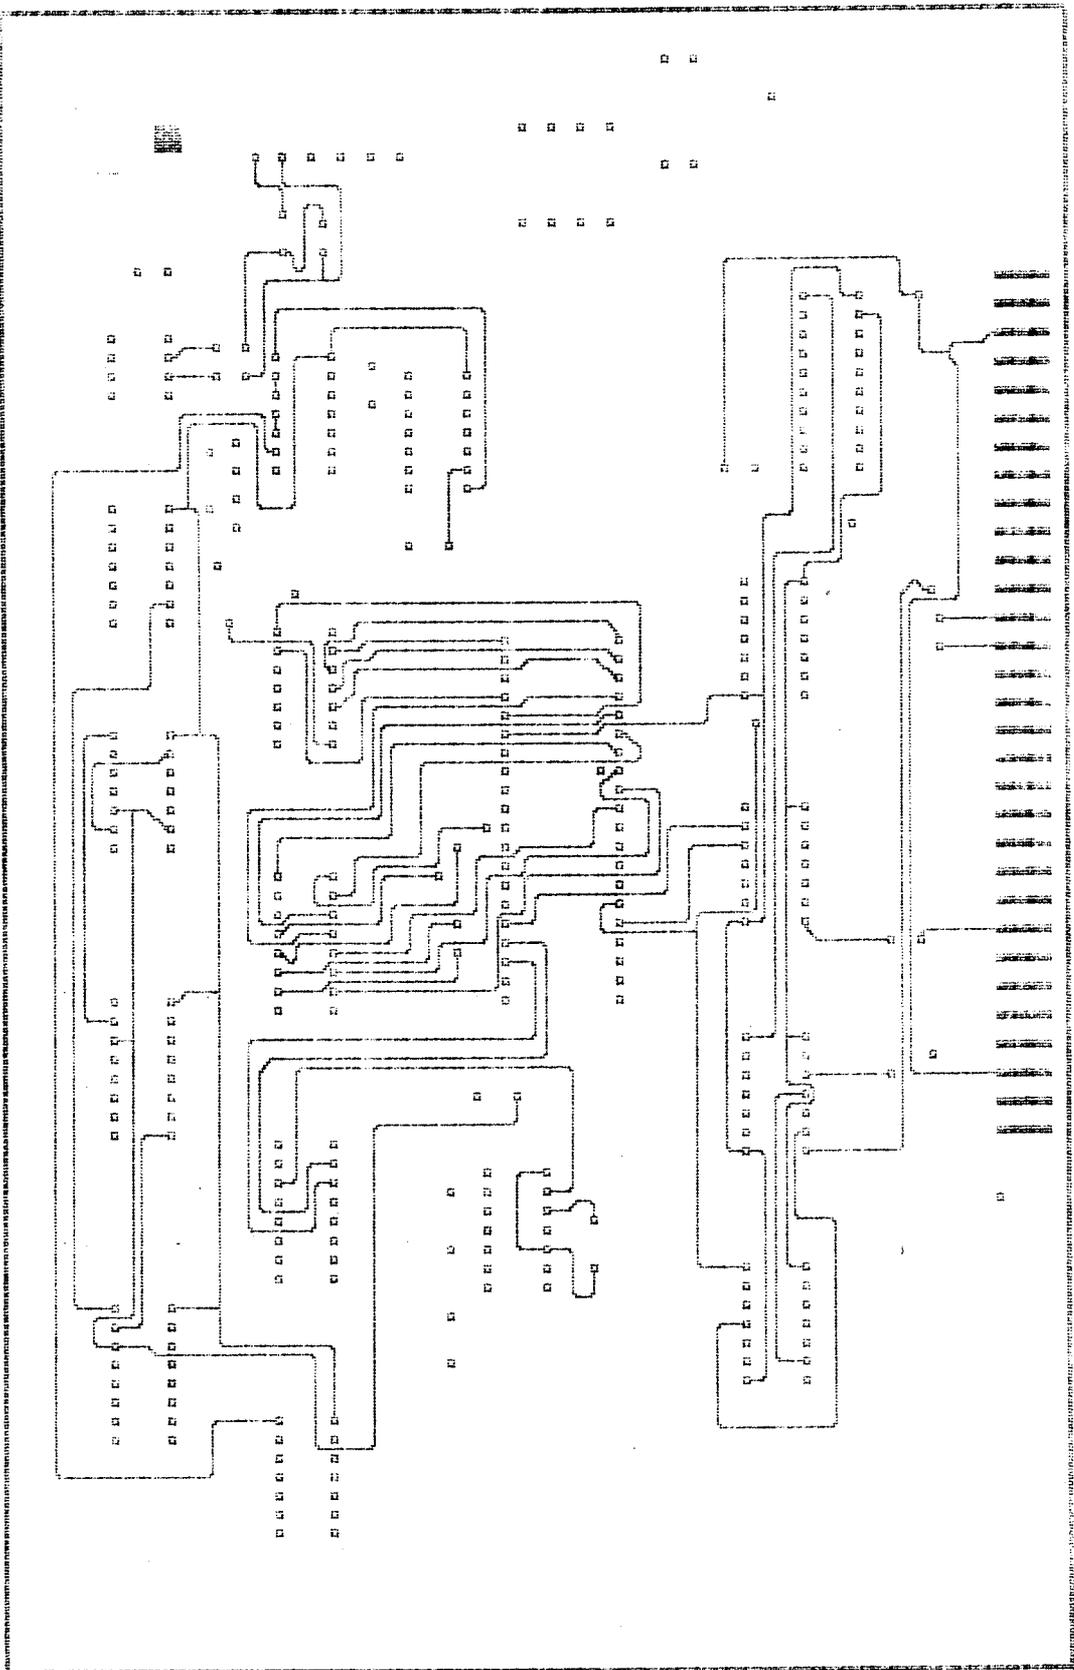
Printed Circuit Board Layout (Upper Layer)
